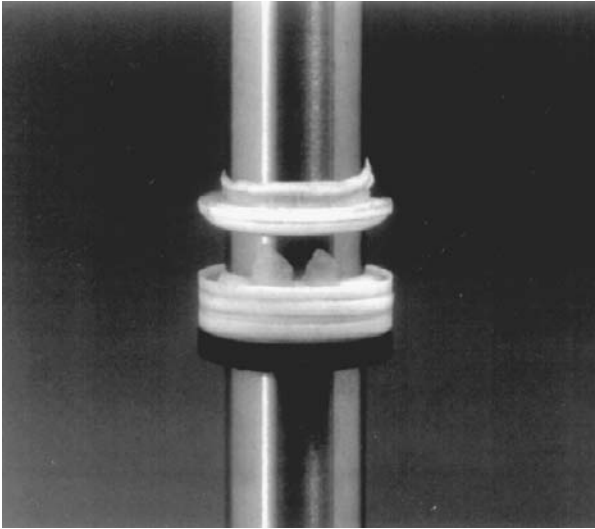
Vacuum-seal twin V-ring packing or lantern-ring configuration. (Courtesy of Valtek International)
